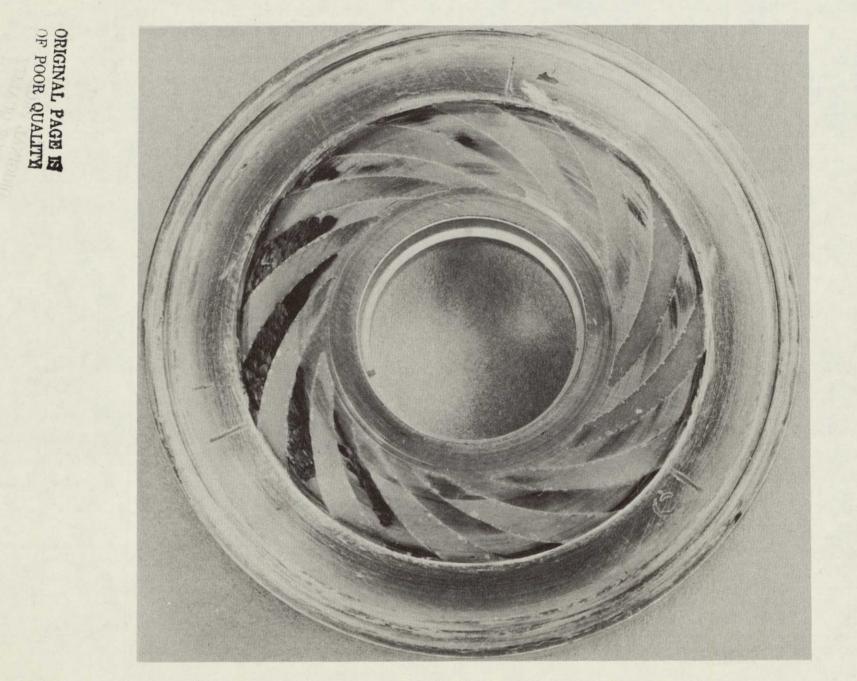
Spiral Groove LOX Seal Mating Ring (P/N C28-0812-10, S/N 01, Damaged by Bearing Failure Posttest 092)
